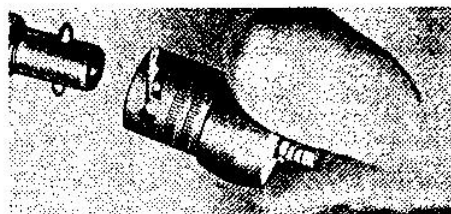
Connecting the 5329 Adaptor (Hydraulic to Pin Type) to fitting.
